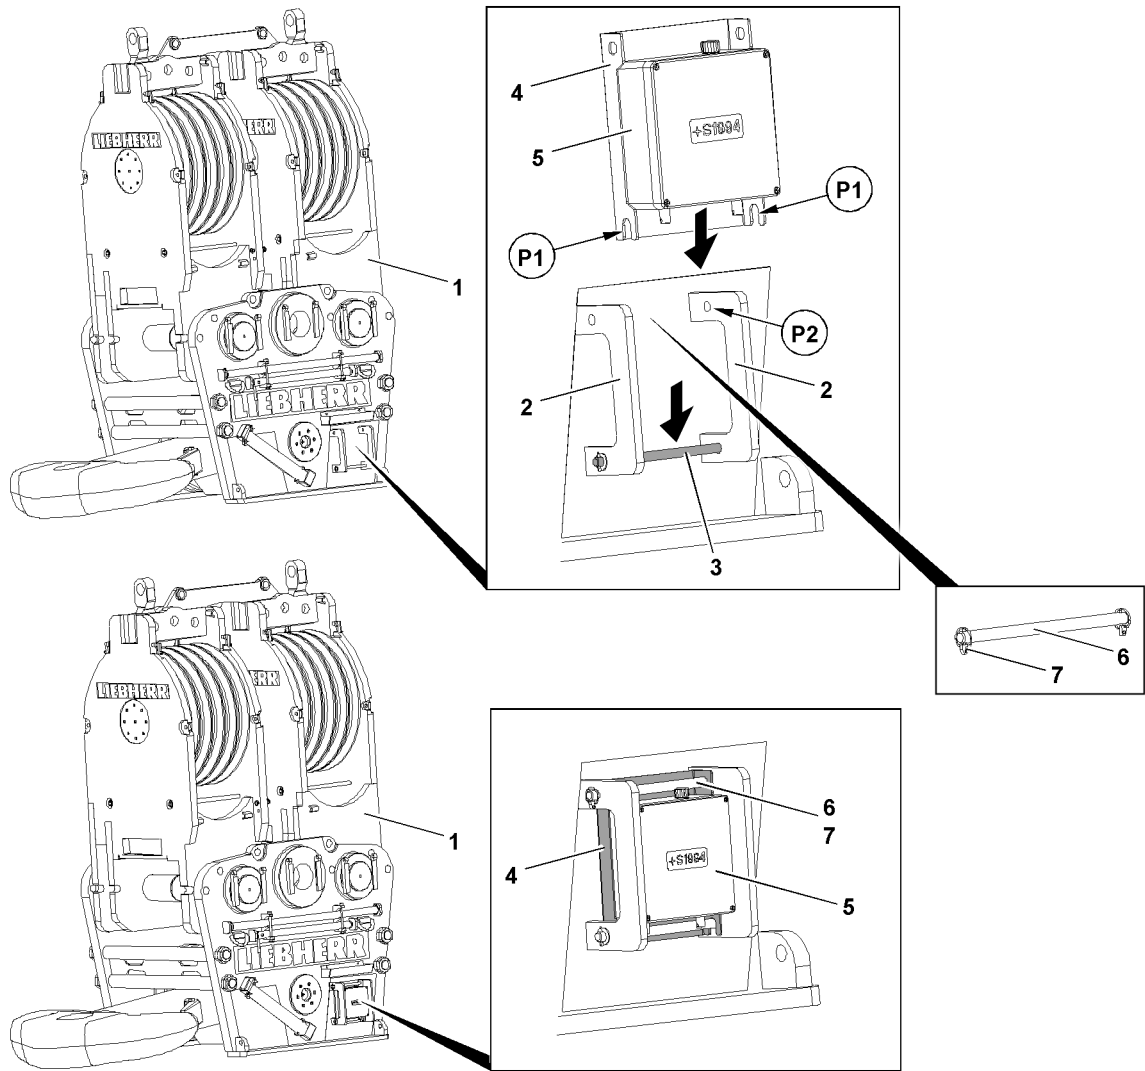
Assembly of the radio sender unit 5 on the hook block
